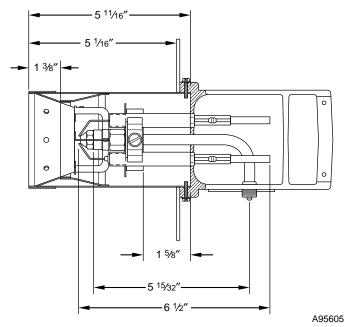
Beckett Burner Fixed Head Dimensional Relationships for 120 Size Unit
